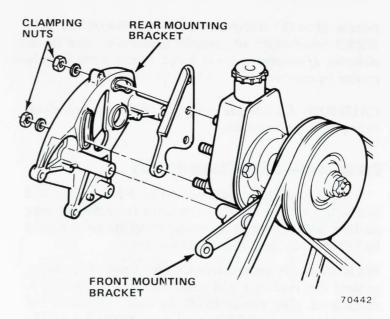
C-20 Power Steering Pump Drive Belt Adjustment—Eight-Cylinder
